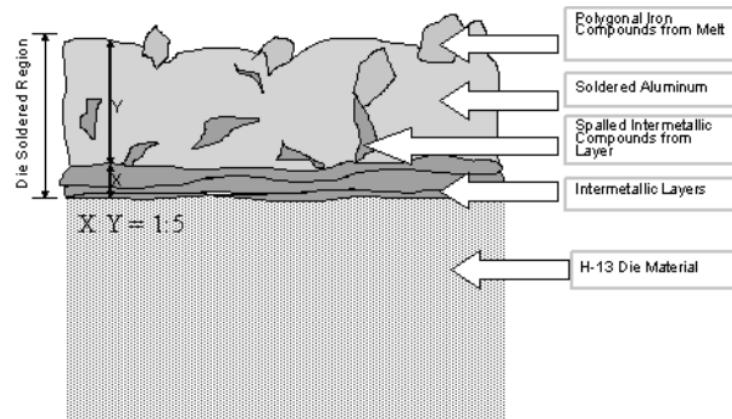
Schematic cross-section of a die showing the intermediate layers and soldered aluminum [3]
